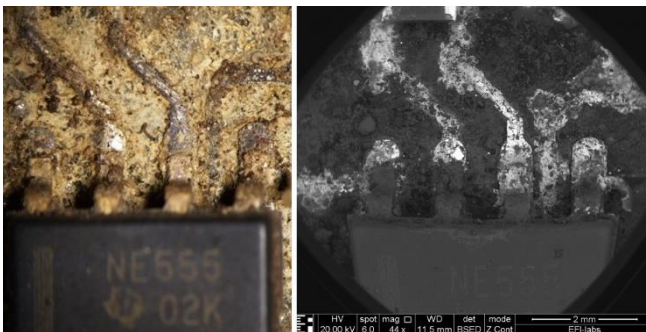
Surface of PLA board (top side – deg_PCB05) after 45 weeks of degradation in the outdoor composting bin
